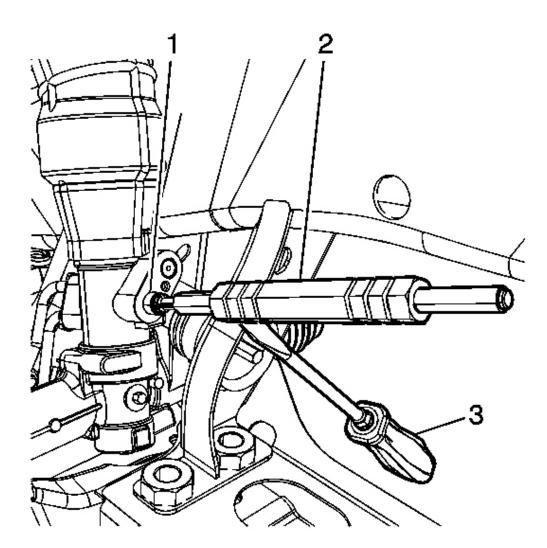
Removing Steering Gear Oil Seal Courtesy of GENERAL MOTORS CORP.
